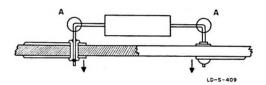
Removal of Part from Printed Circuit Assembly Board
